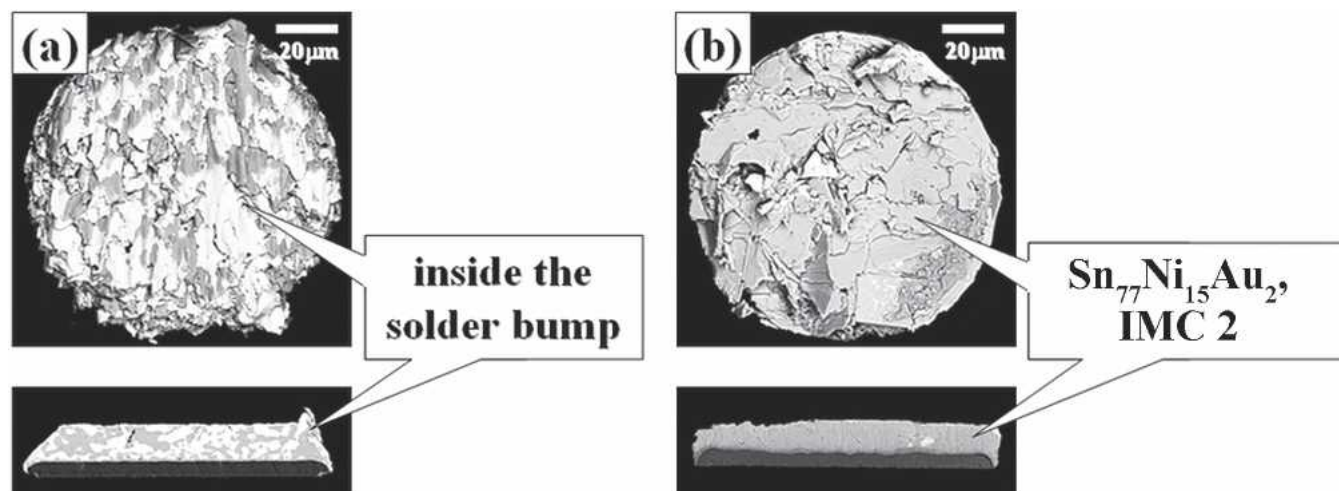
Top-view and cross-sectional images of the fracture surface after the bump shear test: (a) the pre-reflow and (b) 1000 h of aging.
